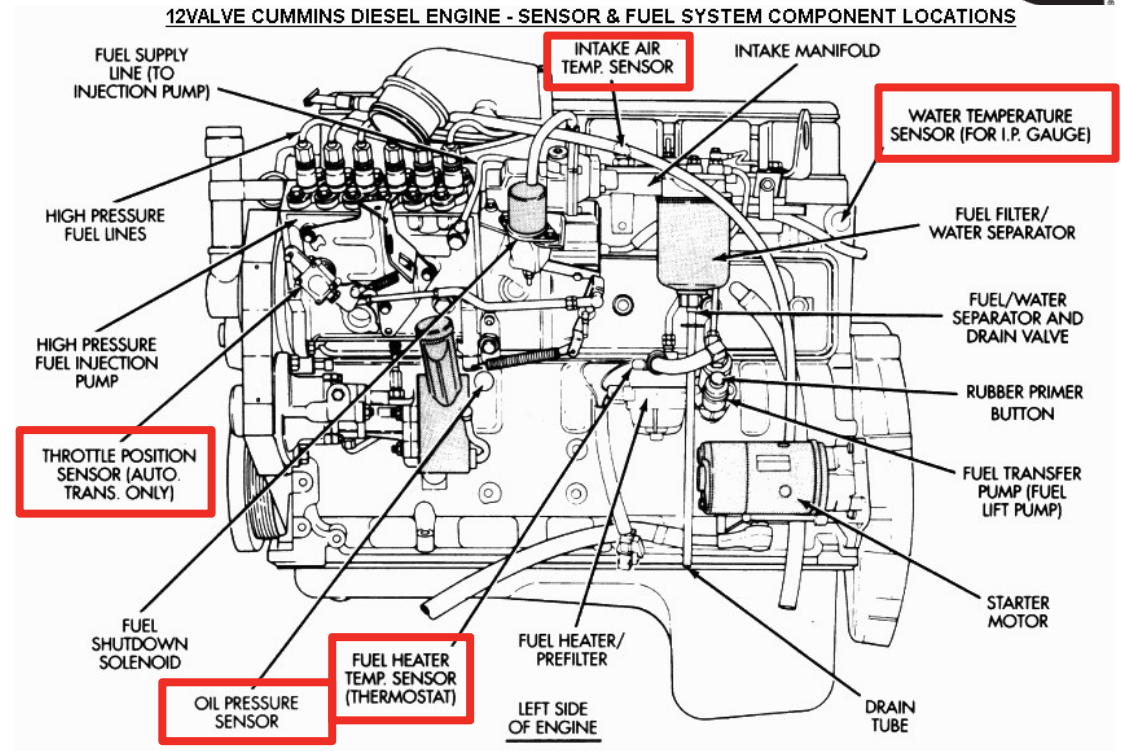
12V Cummins Diesel Engine illustrating fuel sensor components (Cummins).
